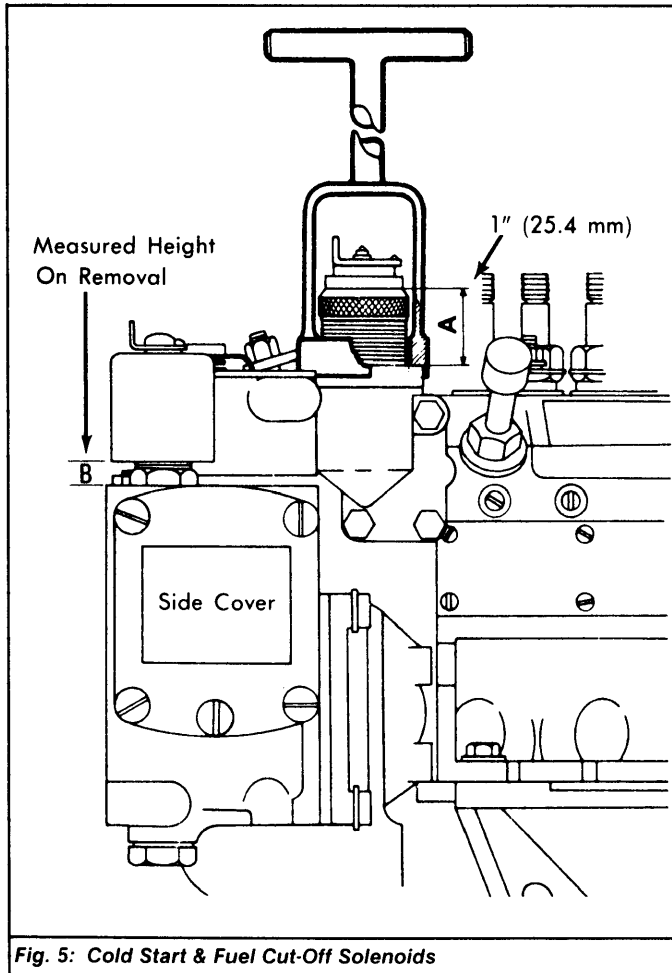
Cold Start & Fuel Cut-Off Solenoids
